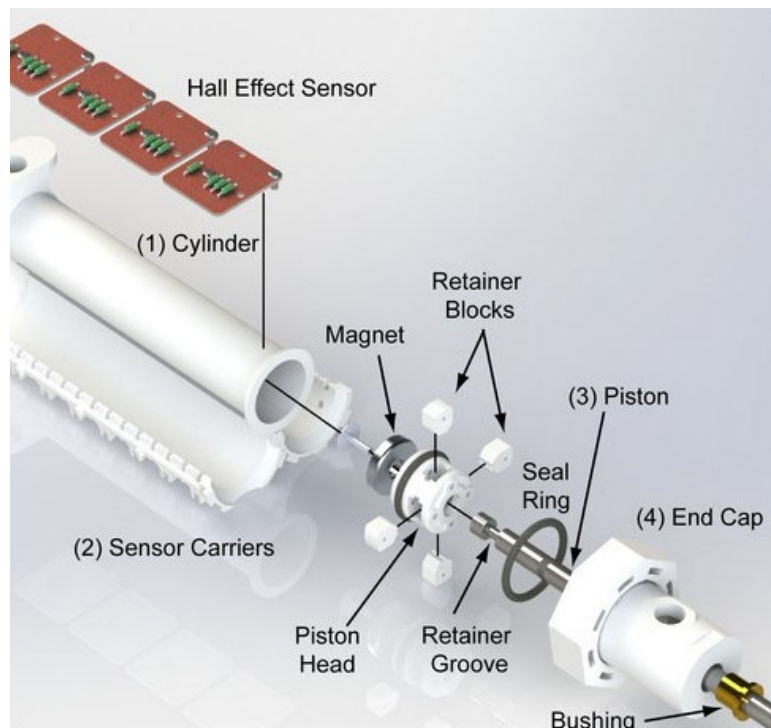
FDM printed pneumatic piston-cylinder system [2].
